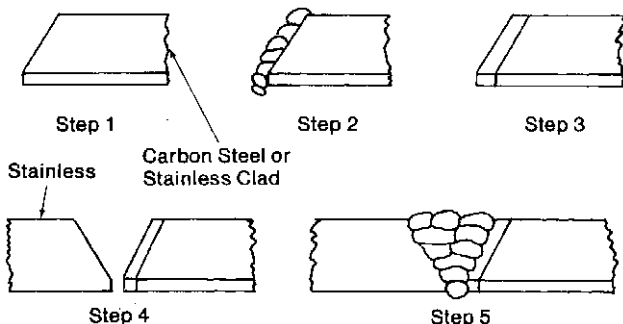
illustrates a method of joining stainless steel components to carbon steel or stainless-clad carbon steel and it is especially useful when stress relief of the carbon steel is needed. This method has been widely used in the welding of stainless steel pipe to stainless steel lined carbon steel or low-alloy steel.
